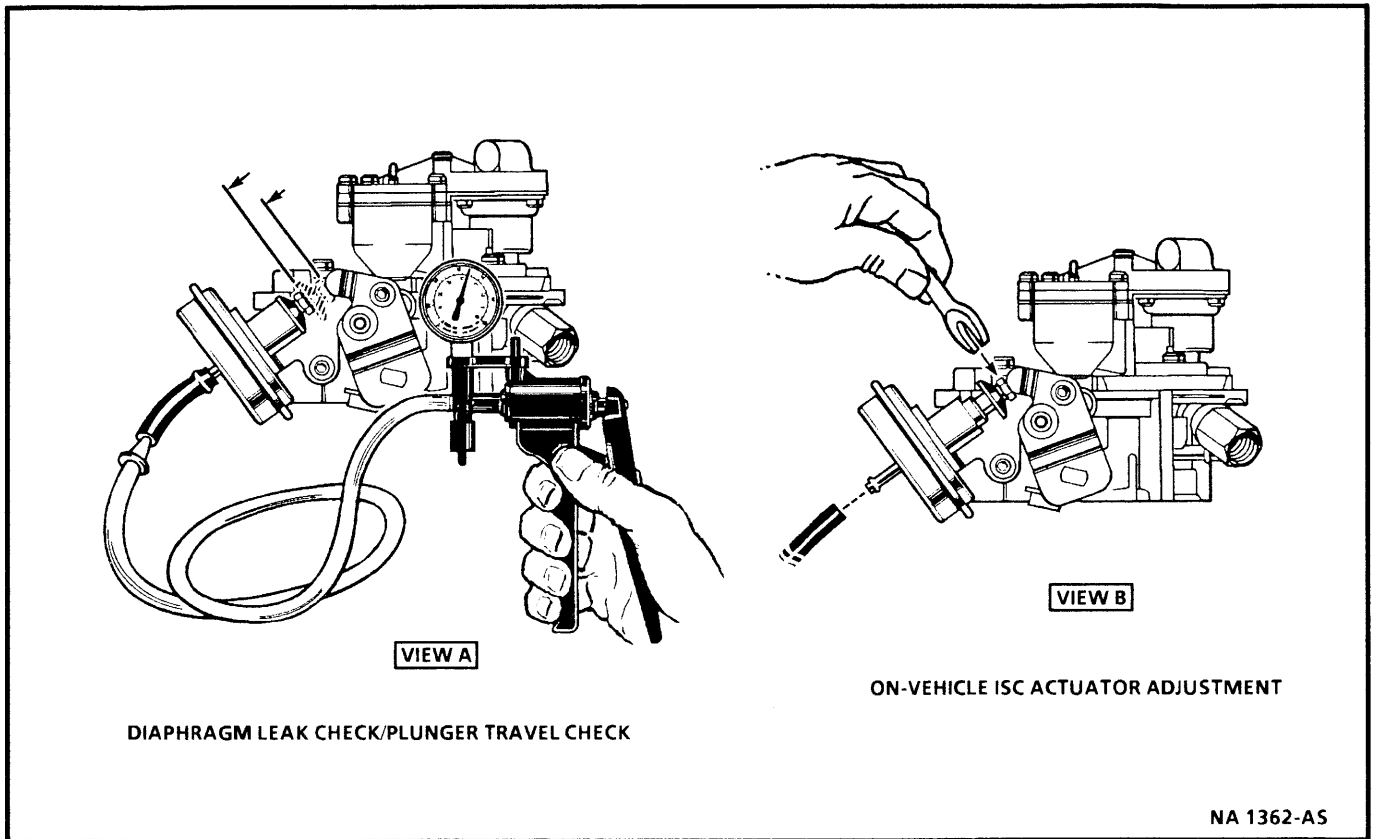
A-19 - ISC Actuator Adjustment (7.4L Only)
